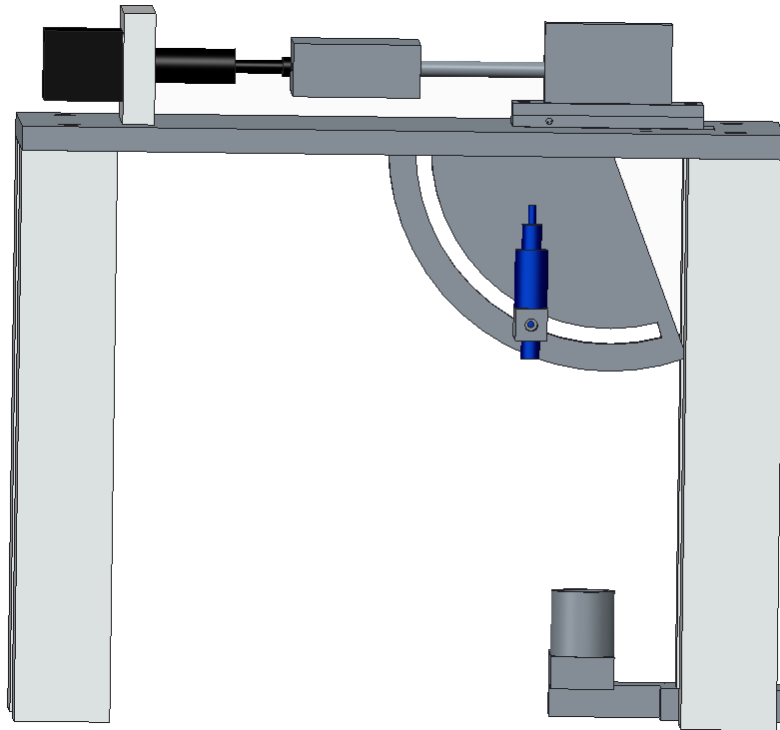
Adjustable sensor holder with degree indicating quarter disk
